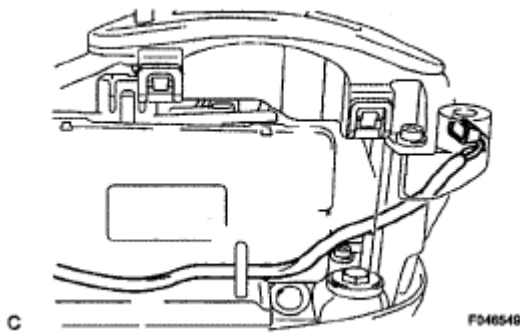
Identifying Indicator Light Bulb And Indicator Light Cap To Indicator Light Wire
